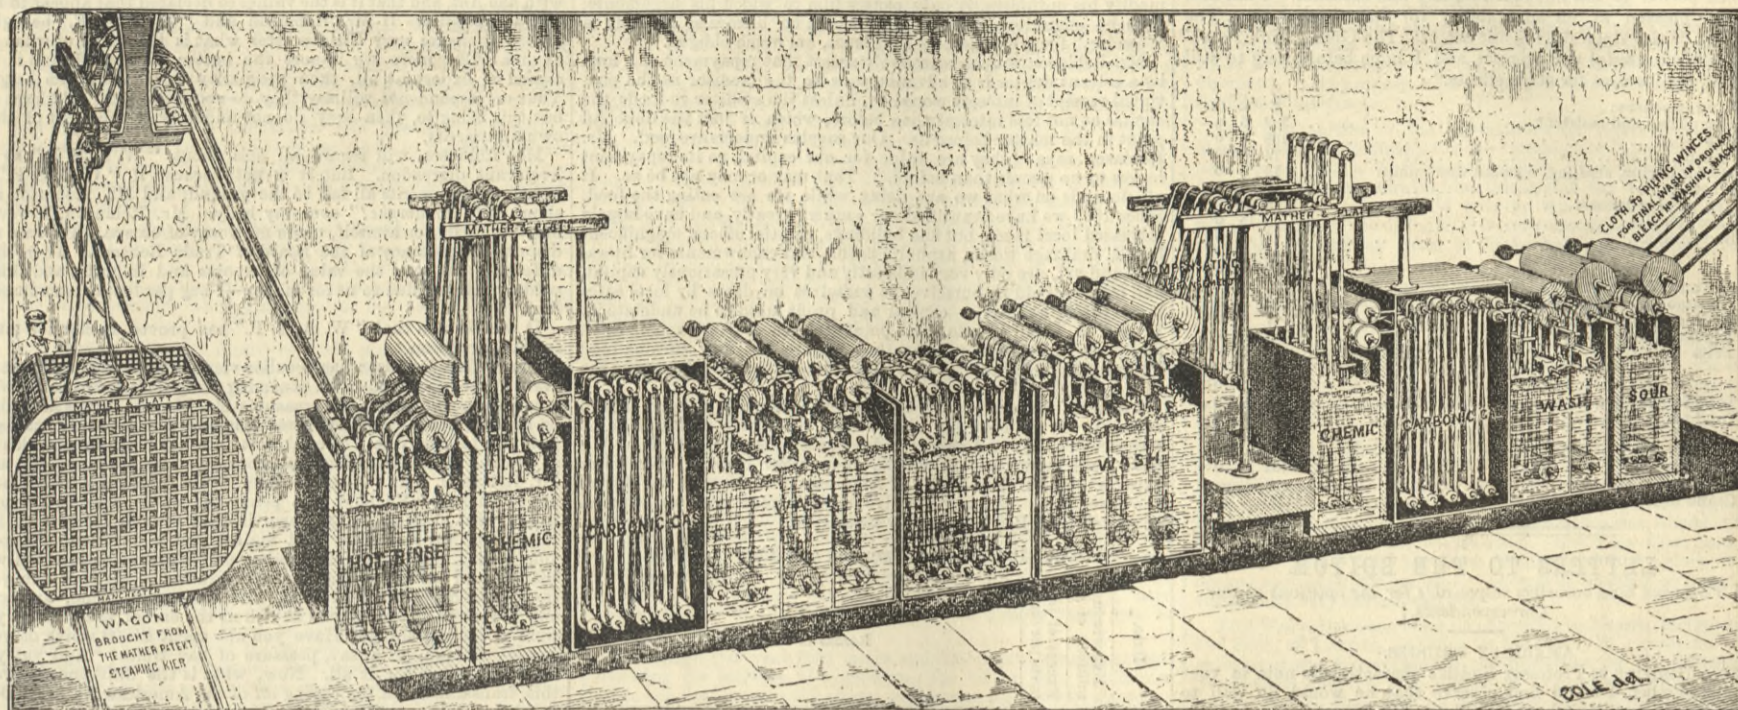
THE MATHER-THOMPSON CONTINUOUS CHEMICKING MACHINE.
